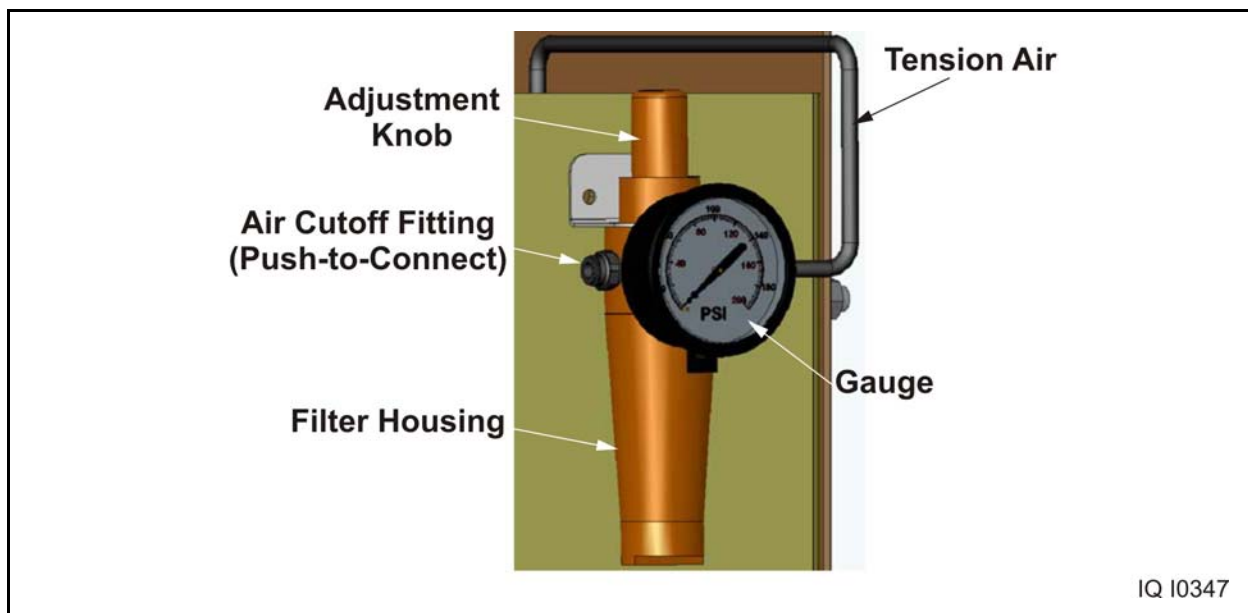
62 Belt Tension Filter/Regulator Assembly
